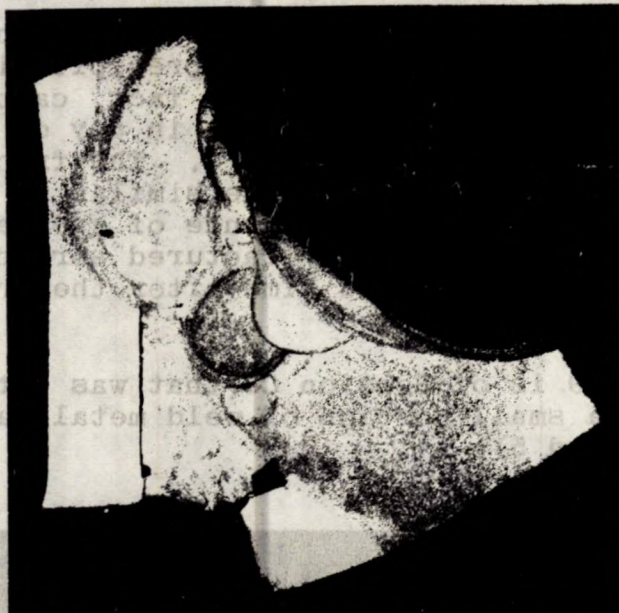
Section C5, showing fractures of the Y-tube (horizontal piece) on each side of the weld penetration, and the presence of lack of penetration and severe lack of fusion at the weld root.
